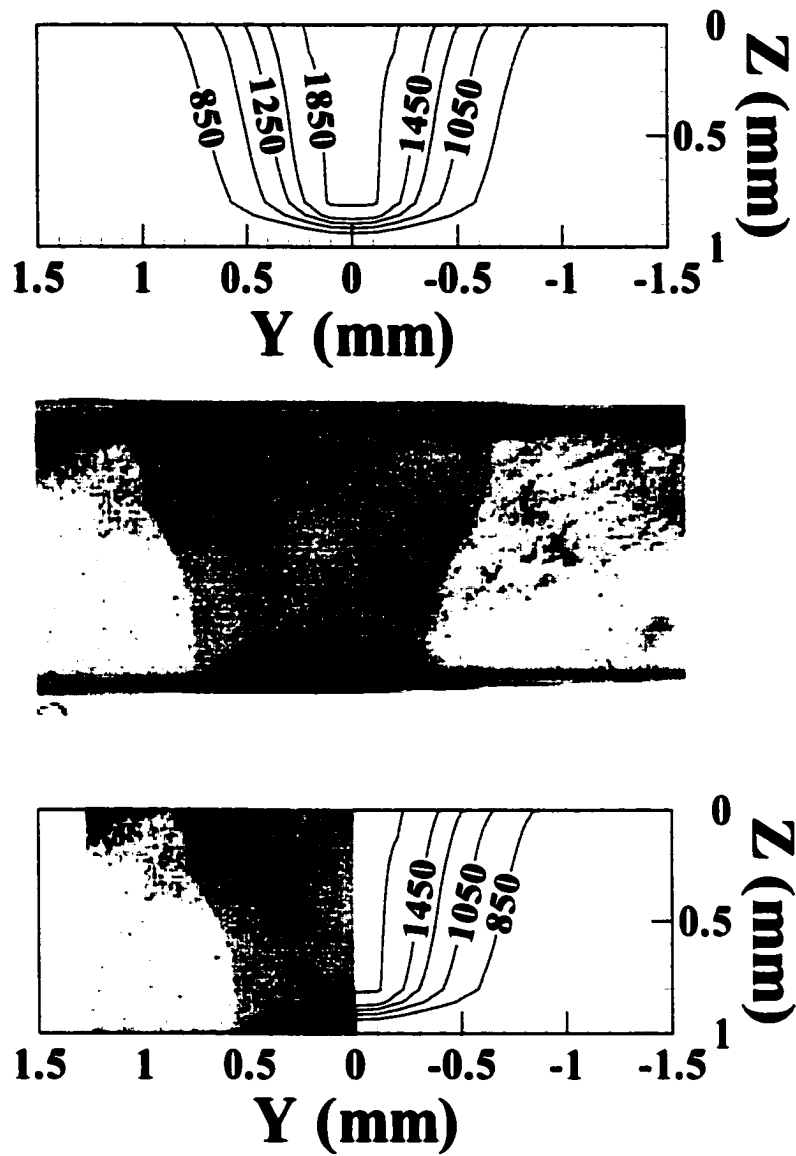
(b) Welding speed: 200 ipm
